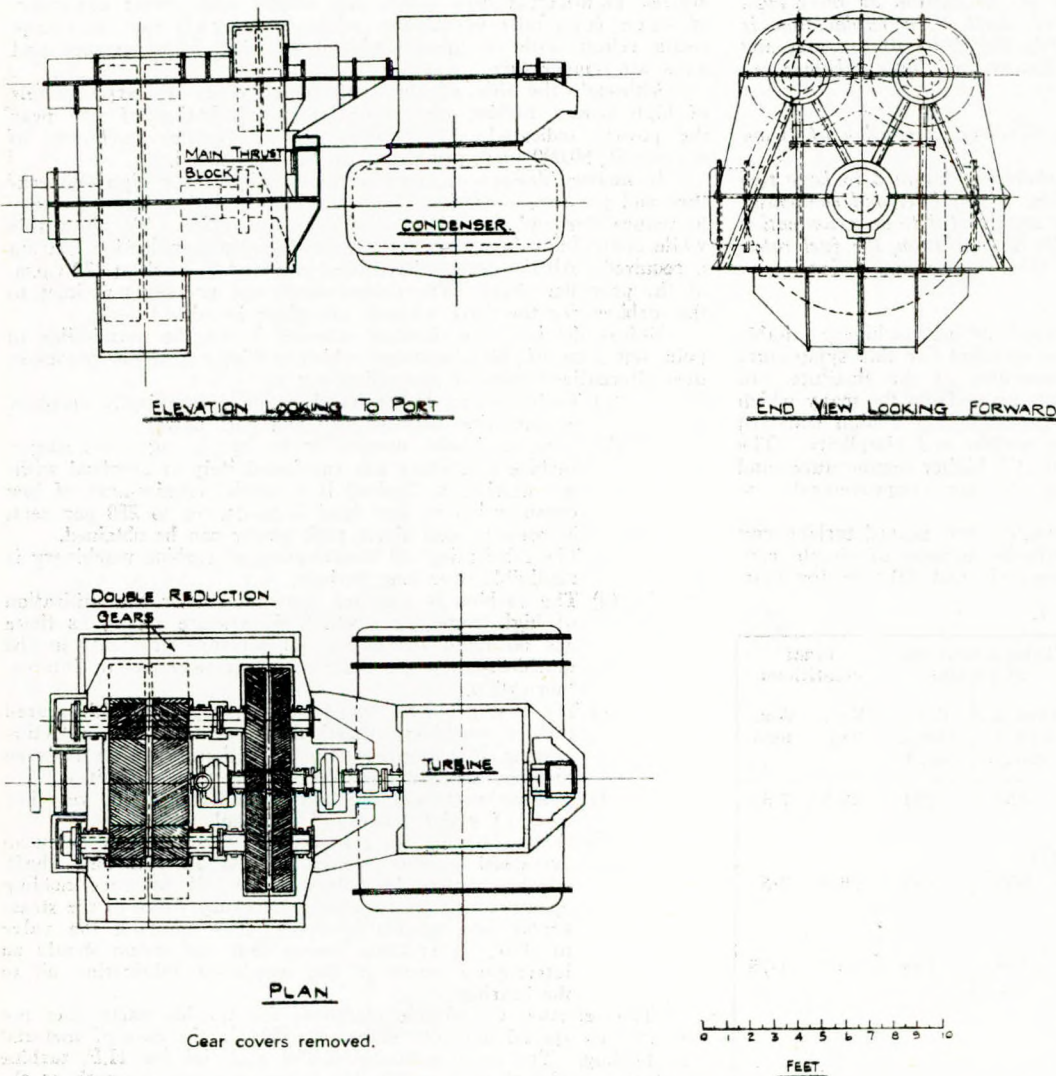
Arrangement of single-cylinder turbine machinery of 7,500 s.h.p. and "locked-train" gearing.
